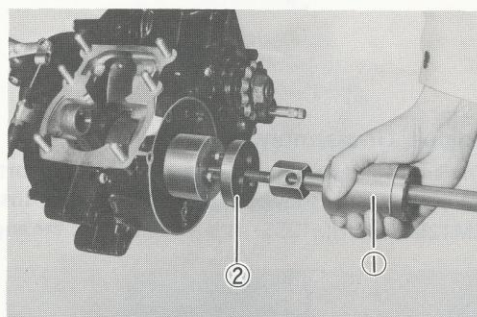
Using two special tools (1) (2), remove magneto rotor.
